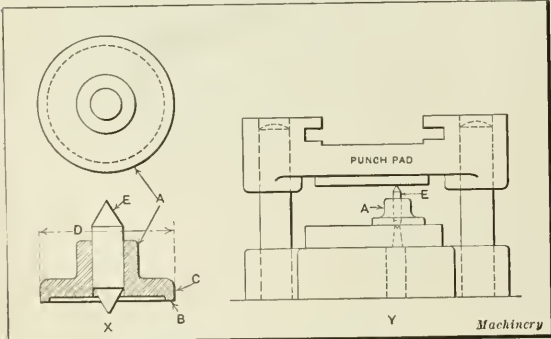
(X) Centering Plug for transferring Holes; (Y) Application of Plug to a Punch and Die Job
